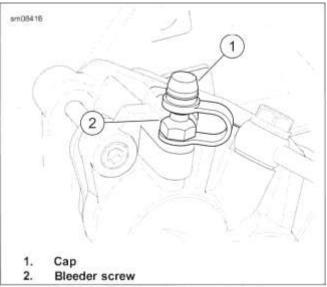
Bleeder Screw (Typical) FILL AND BLEED
